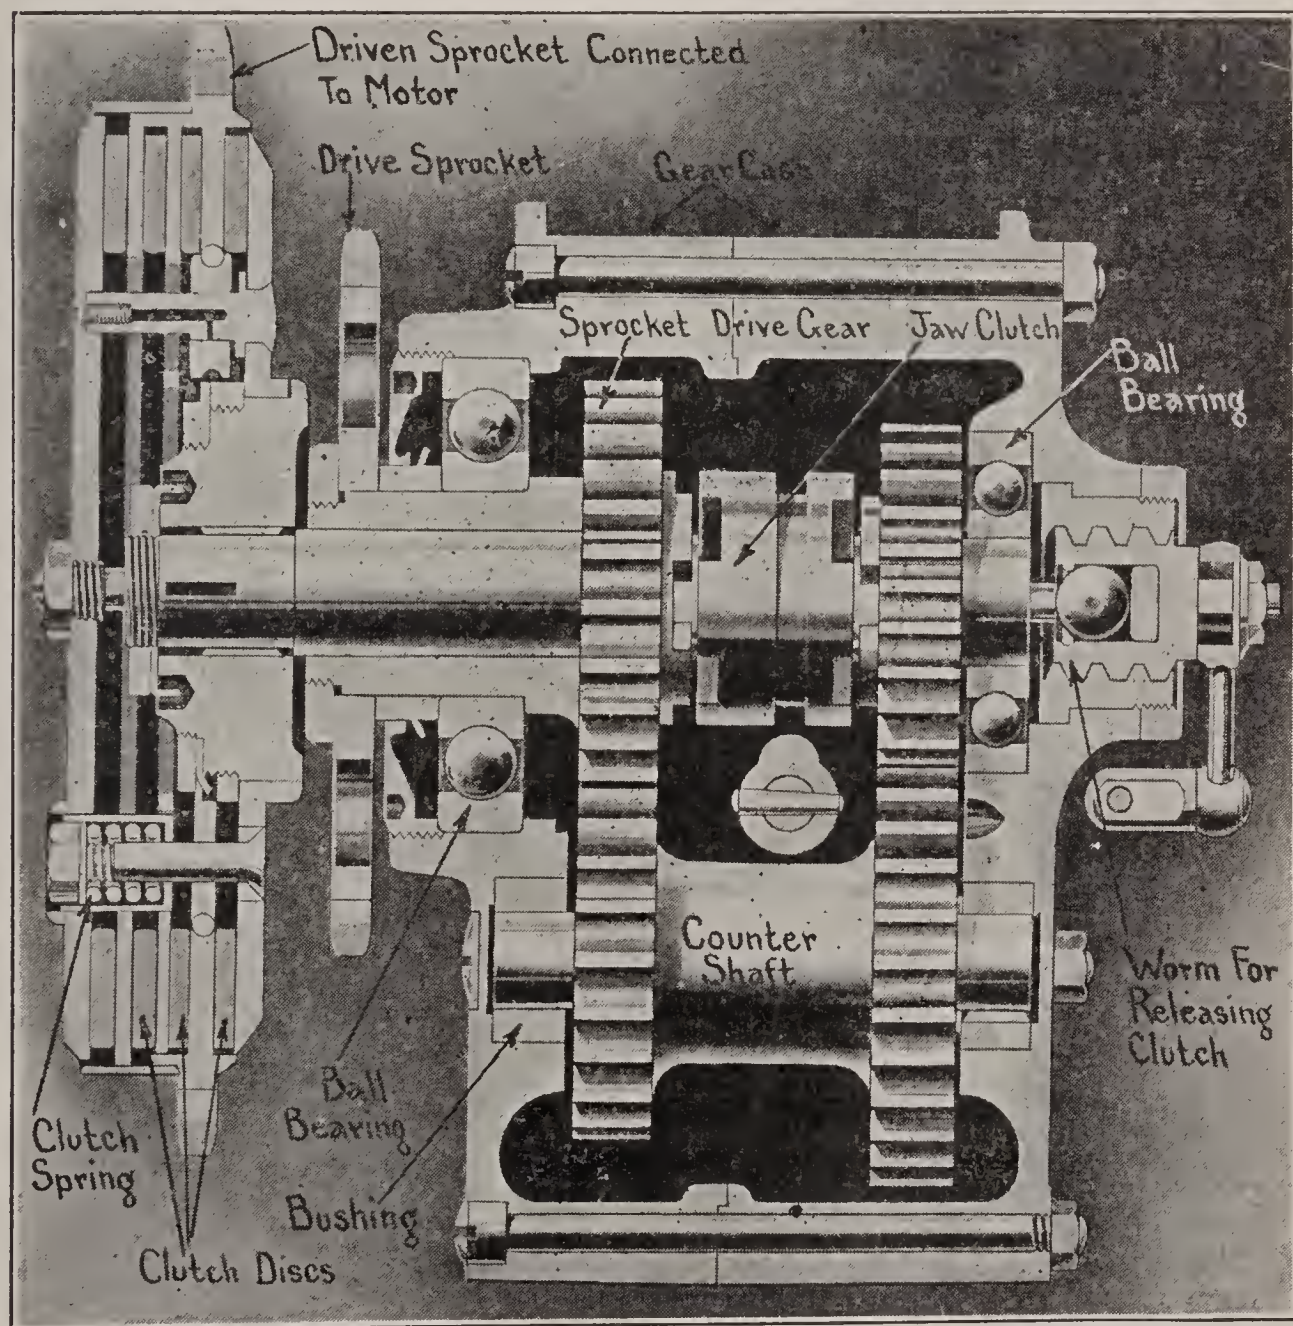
Sectional View Showing the Two Speed Individual Clutch Gear and Master Clutch of the Friction Type Employed on the Indian Motorcycle.
